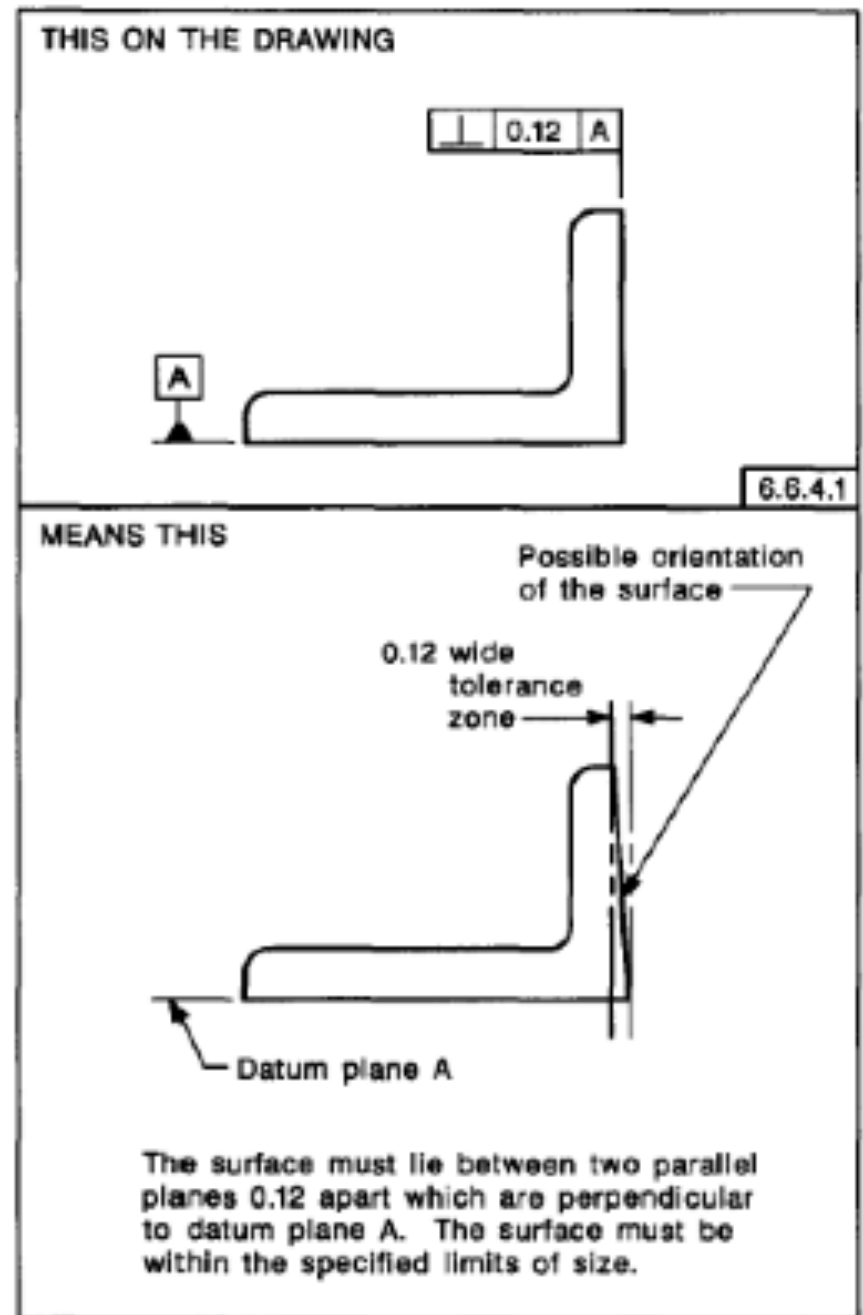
SPECIFYING PERPENDICULARITY FOR A PLANE SURFACE
